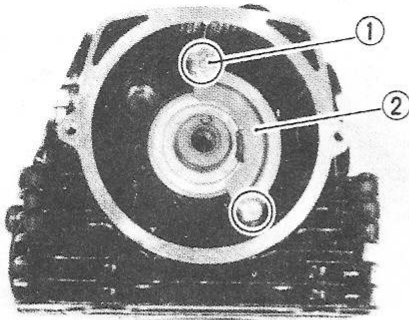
B.6 After flattening the tab, remove the bolts (1) and detach the retainer plate (2) to remove the camshaft (Sec 7)
